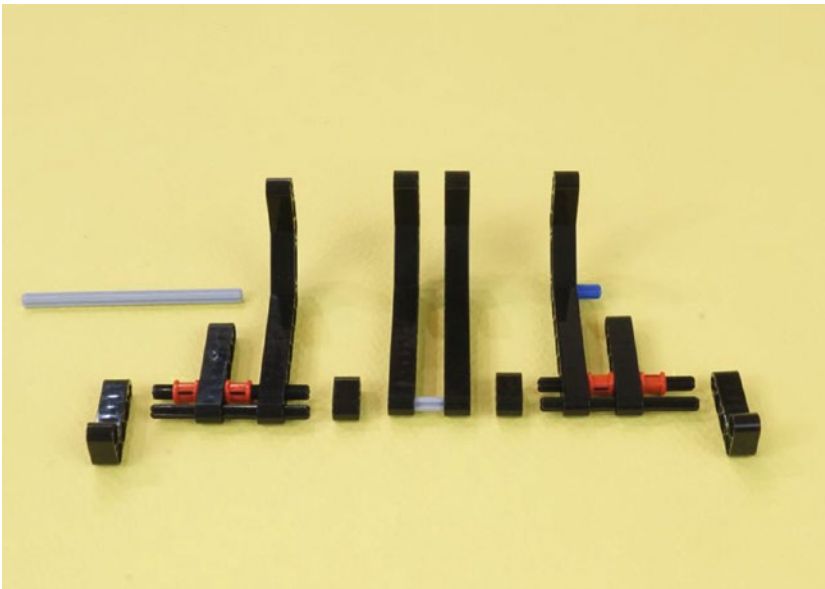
This exploded view shows all of the parts from Figure 15-32. The 9-hole gray axle will be mounted in the next figure. 6-hole black axles.
